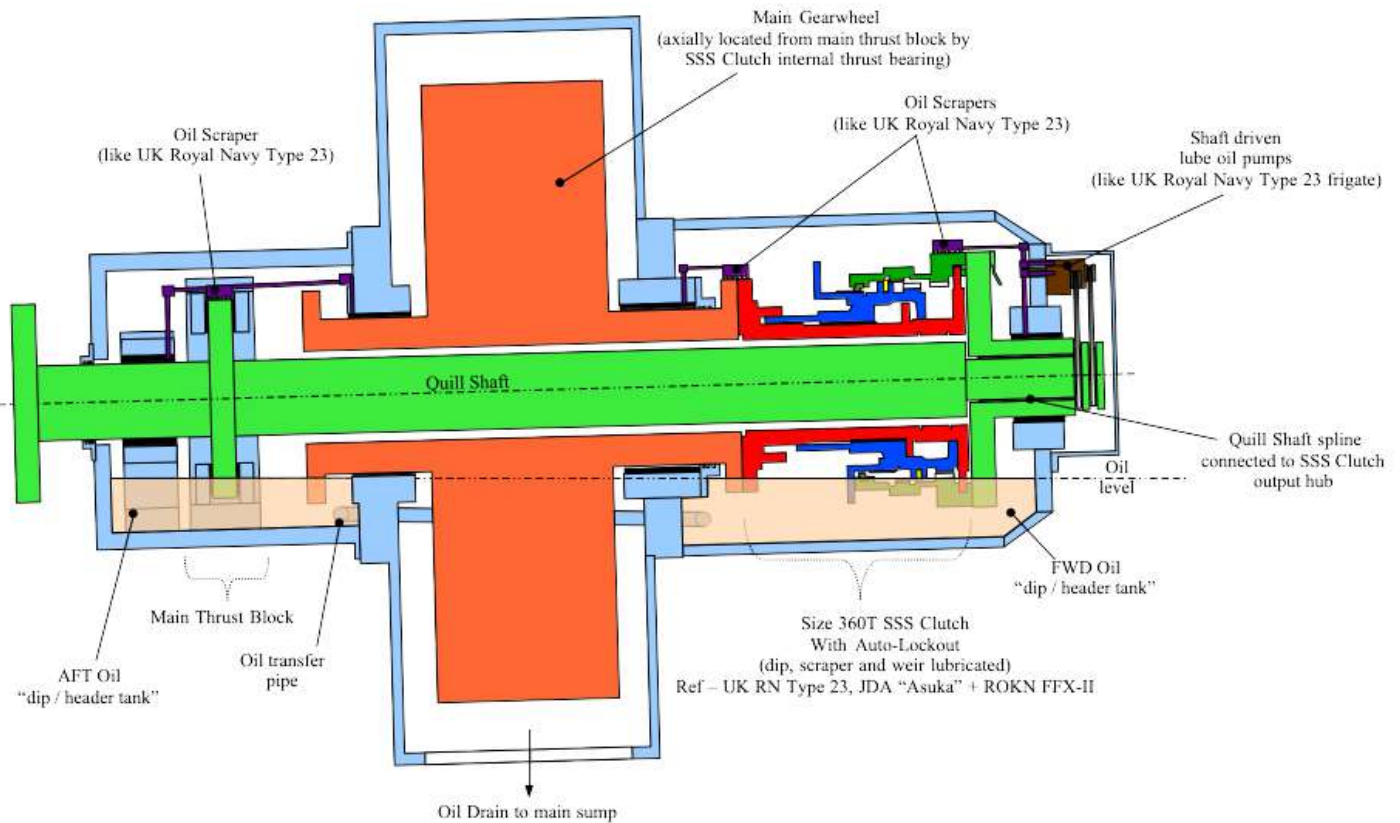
SSS Propeller Shaft Clutch in quill shaft arrangement
